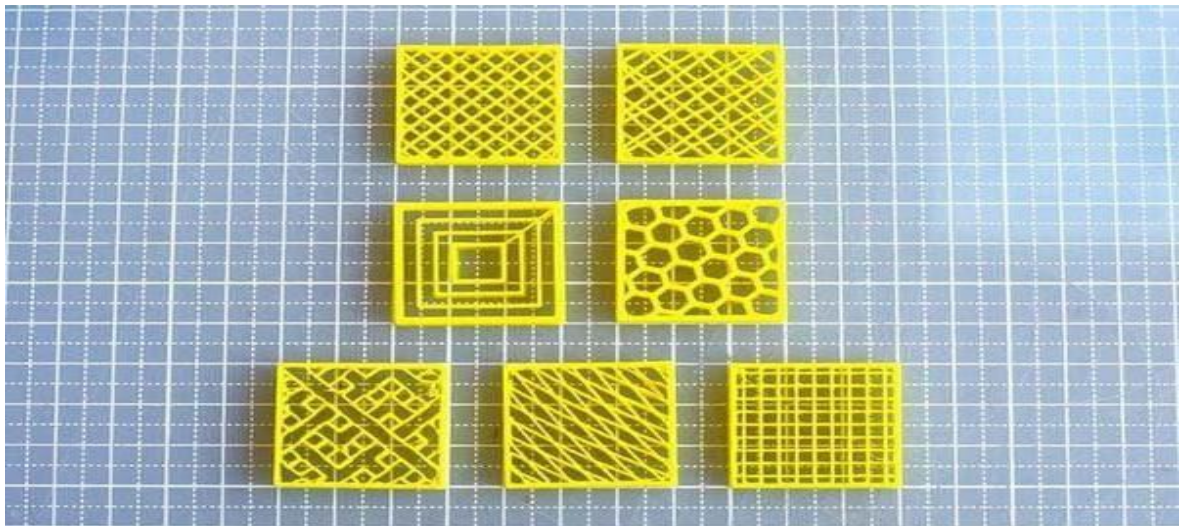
Make Use of a Sturdy Infill Pattern.
